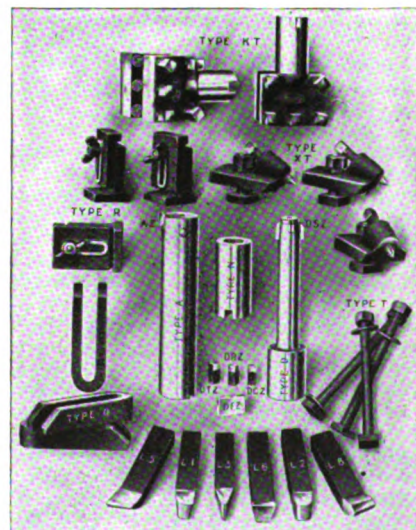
TYPICAL STANDARD TOOL EQUIPMENT FOR VERTICAL TURRET LATHES
